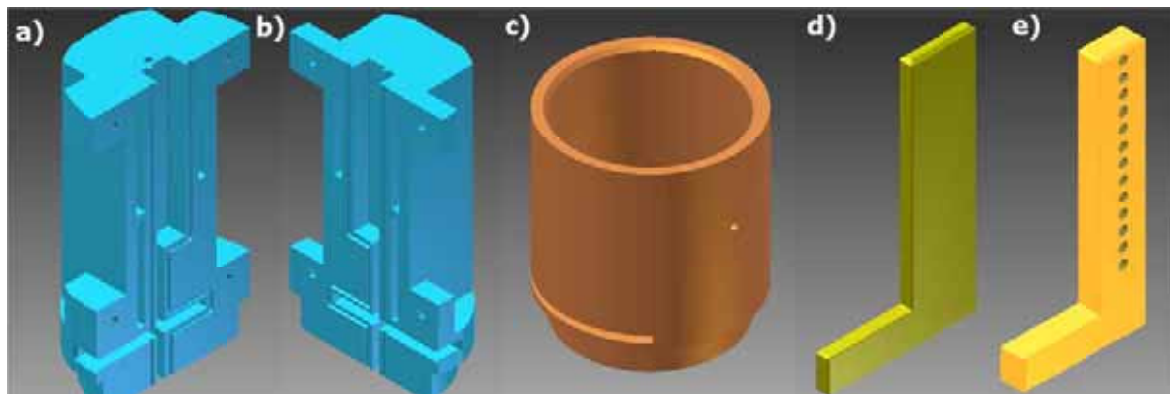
3D solid models Vapor HF Etching Setup design components. a) Front body, b) rear body, c) container, d) gate, e) wafer holder.
